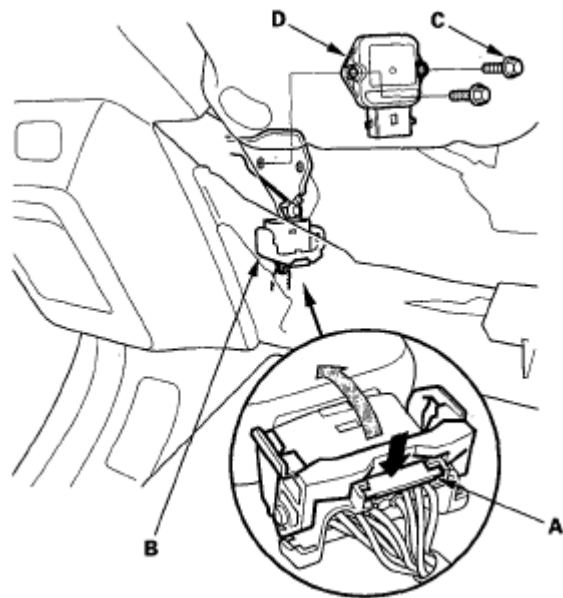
Pushing Tab And Throttle Actuator Control Module 16P Connector
